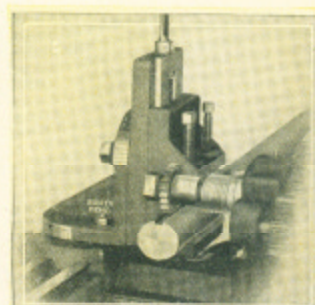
Cutting a Standard Keyway in a Long Shaft.
